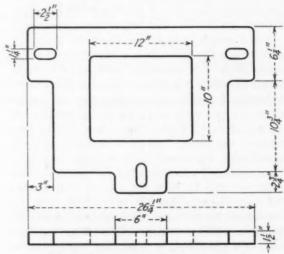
Torch cutting of filler plates and punch press bolster plates is often accurate enough to eliminate machining. This part was torch cut at 12 ipm.
